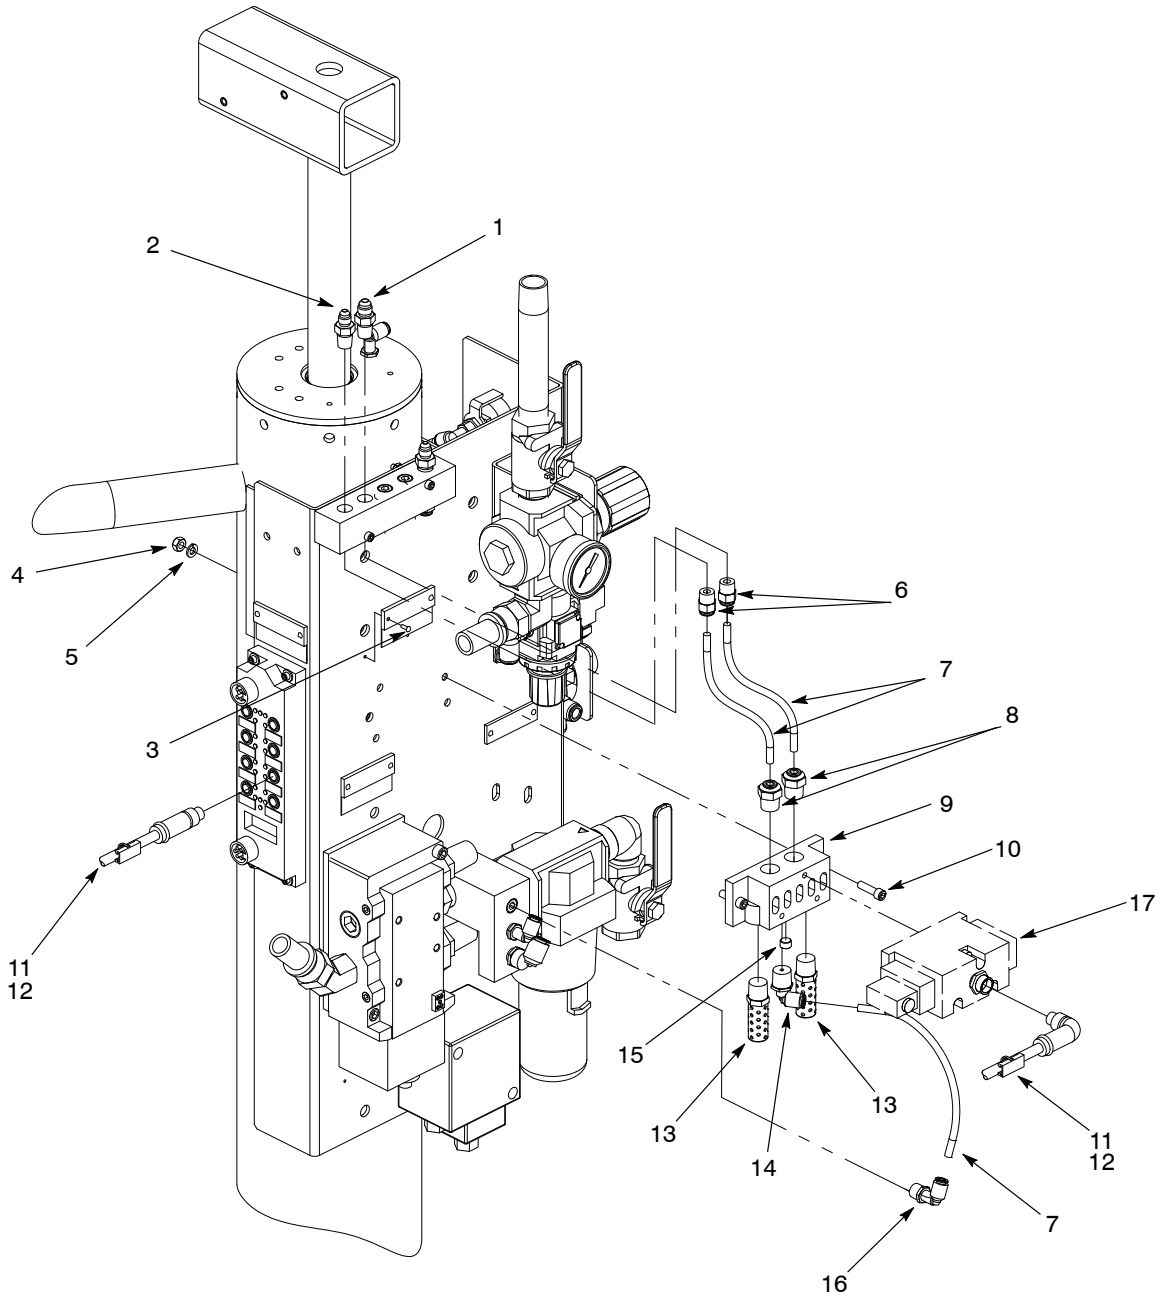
24 Vdc Automotive 125 Series Valve Base with DeviceNet I/O Block Cable
